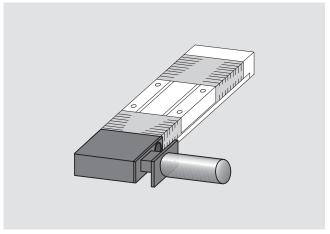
Screw drive with lateral motor mount at topside (Mounting condition 06)
